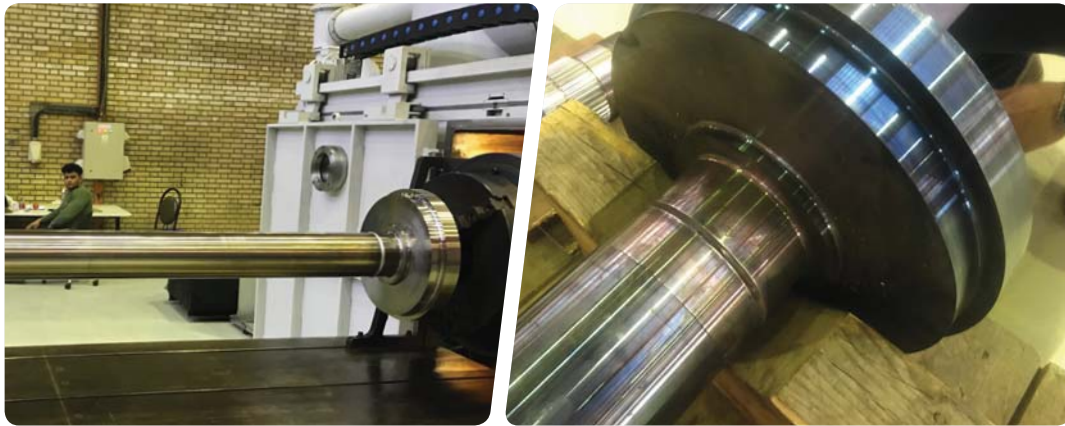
Welded LPT shaft of MGT-30 gas turbine
